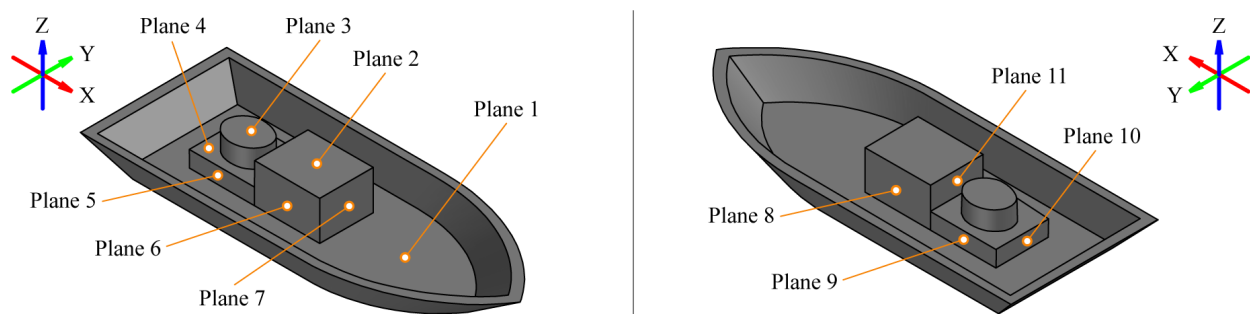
Isometric view of the reference model with indication of the planes used for dimensional inspection
